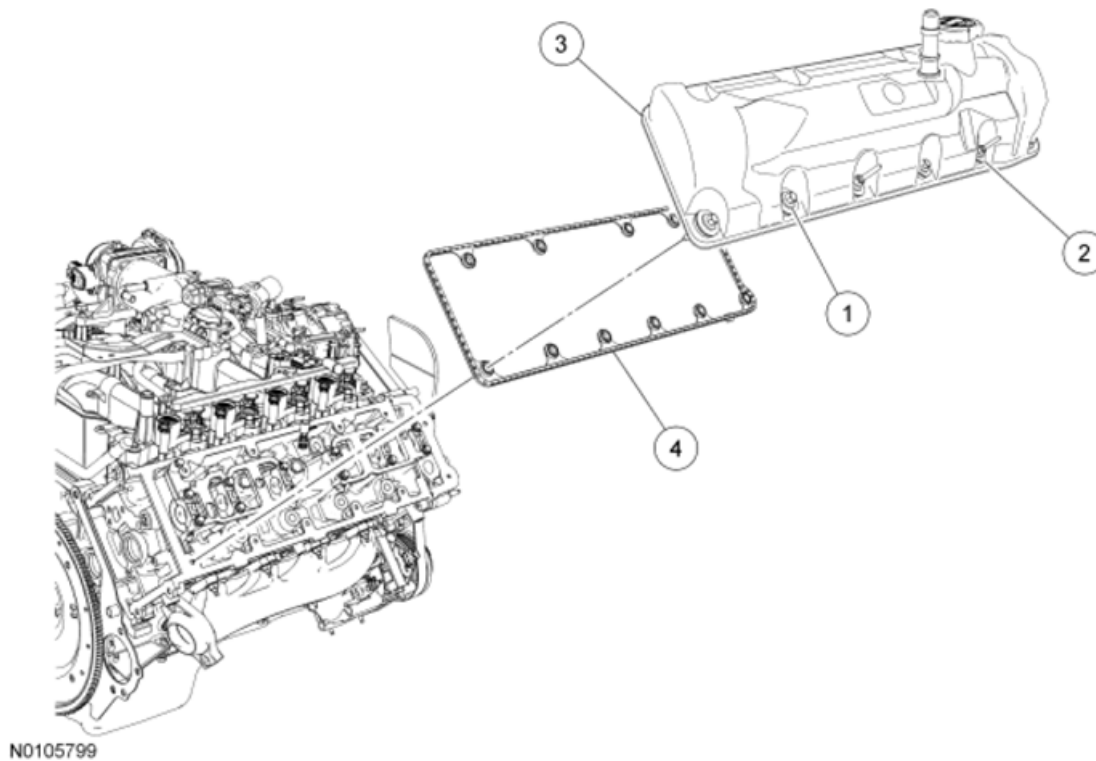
Identifying Valve Cover Components - RH (View 4 Of 4)
